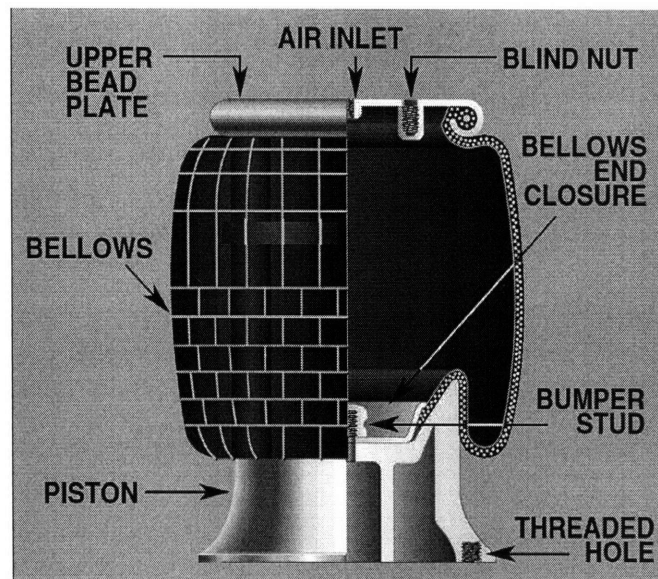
Reversible Sleeve Air Spring with crimped bead plates (Firestone 2005)
